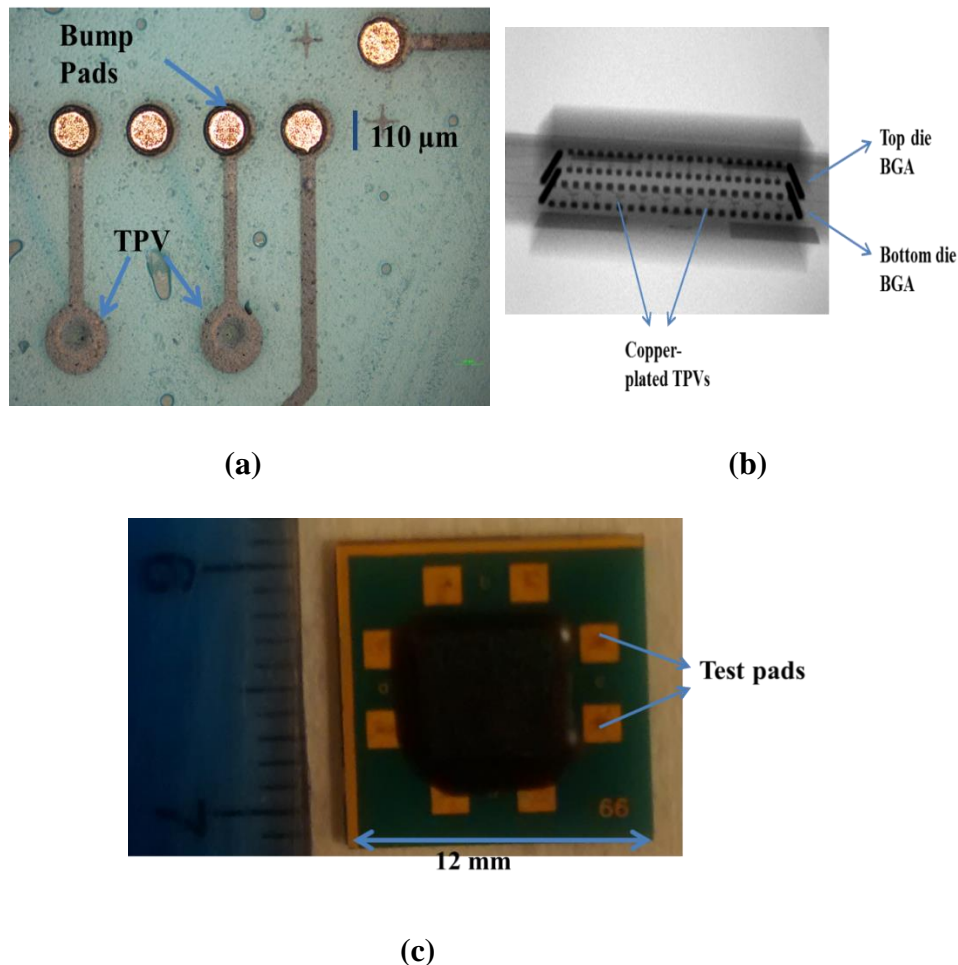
(a) BGA land pads and Glass interposer with coupons after assembly (b) X-ray image of test coupon
